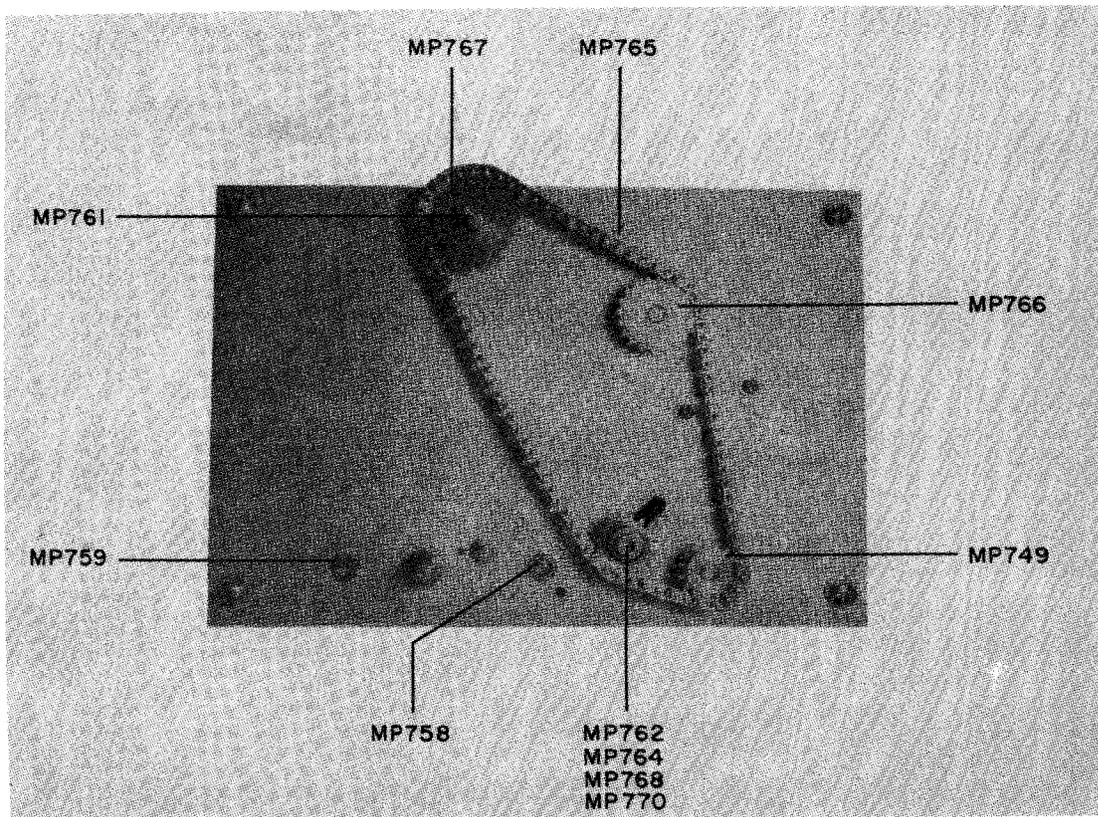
A. Electrical Frequency Control C-2764/WRT-2, Location of Parts on Back Plate of Gear Box, Sets, Serial Nos. A1 thru A178, D1 thru D327.
